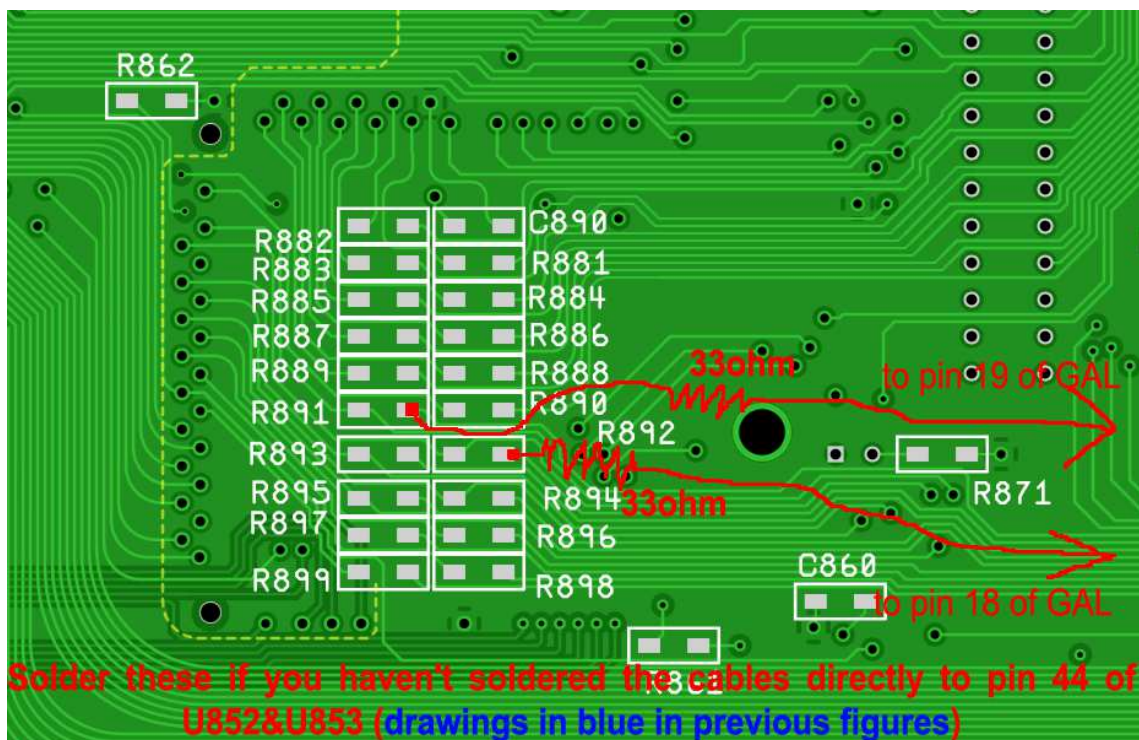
if you haven't soldered the cables to pin 44 of U852&U853 you can solder the resistors and the cables here. These will probably be shorter
